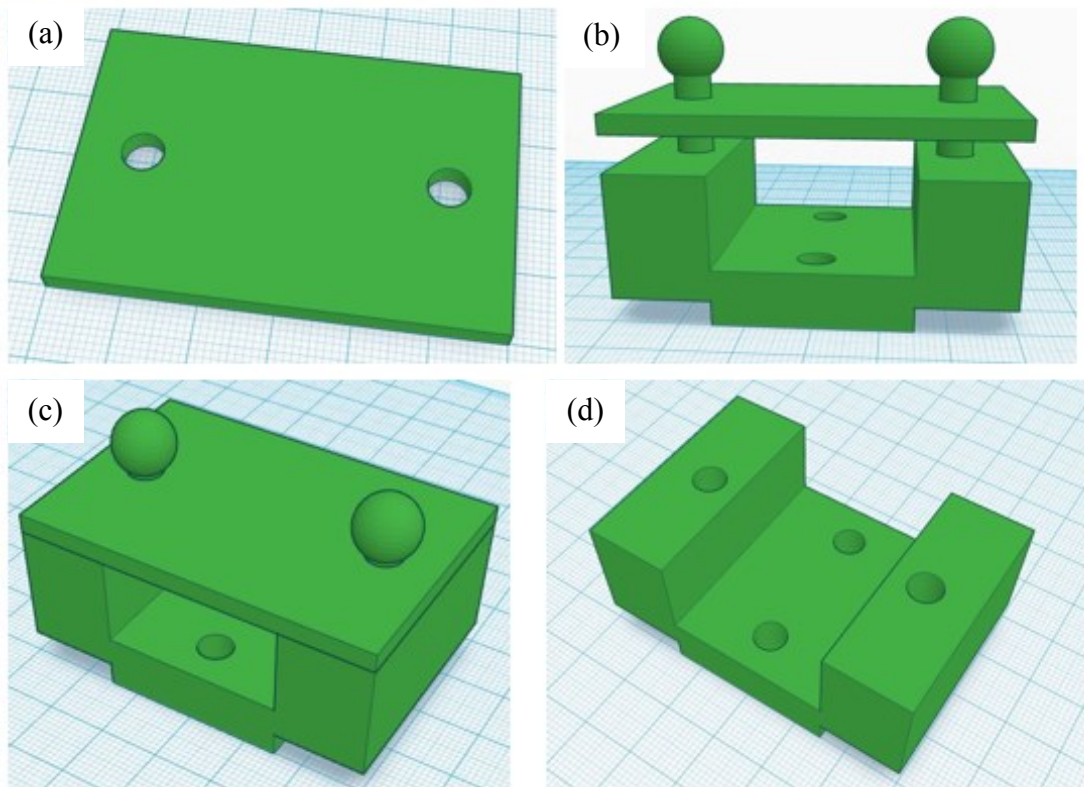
3D printed components for the vertical suspension configuration. (a) Boundary layer; (b) schematic of the coil holding system; (c) coil holding system with pins fully inserted; (d) 3D printed coil holder.
